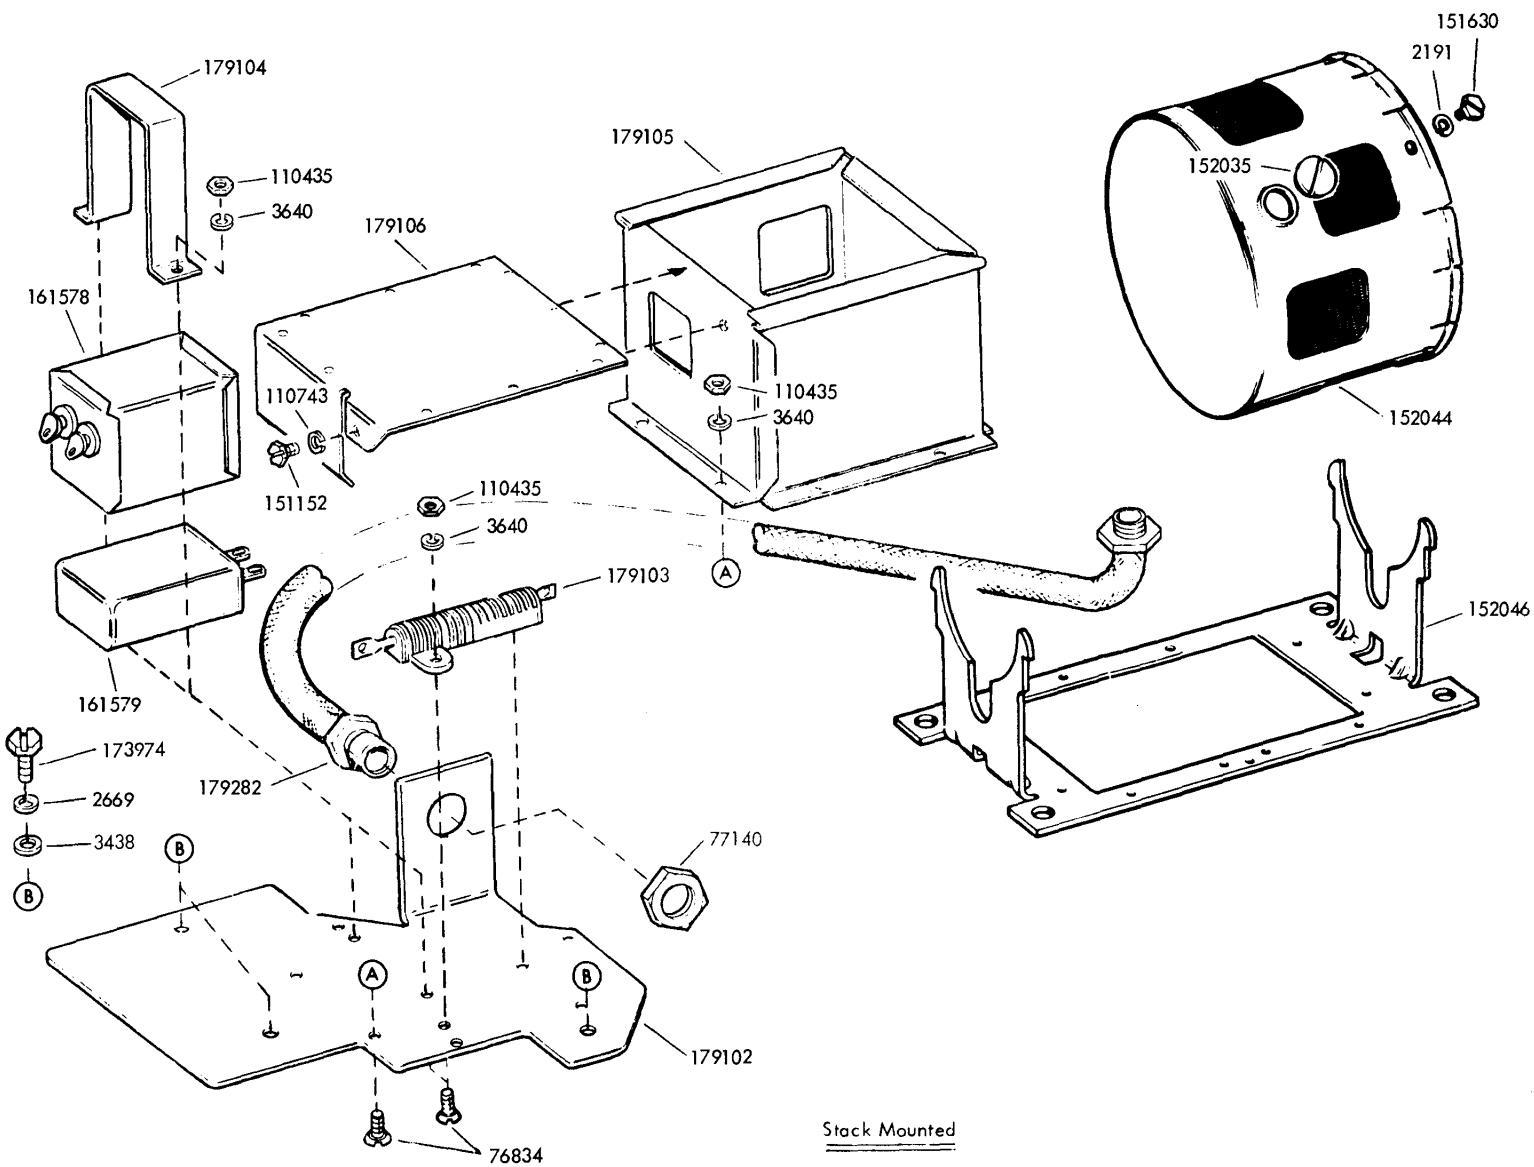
SERIES MOTOR MOUNTING PARTS
